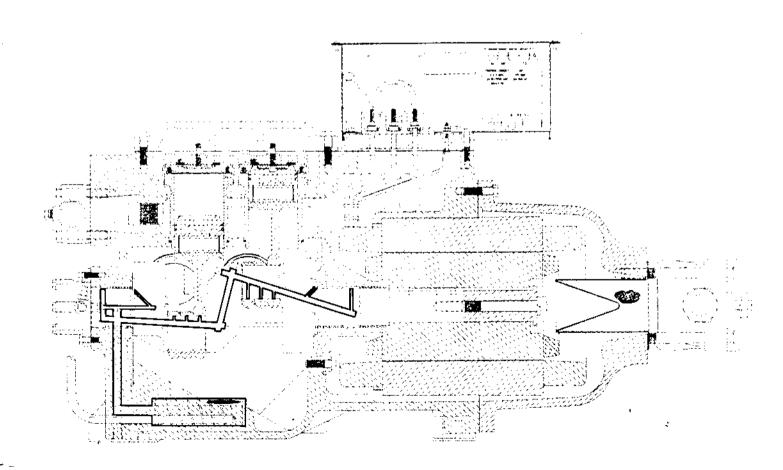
COMPRESSOR LUBRICATION SYSTEM
